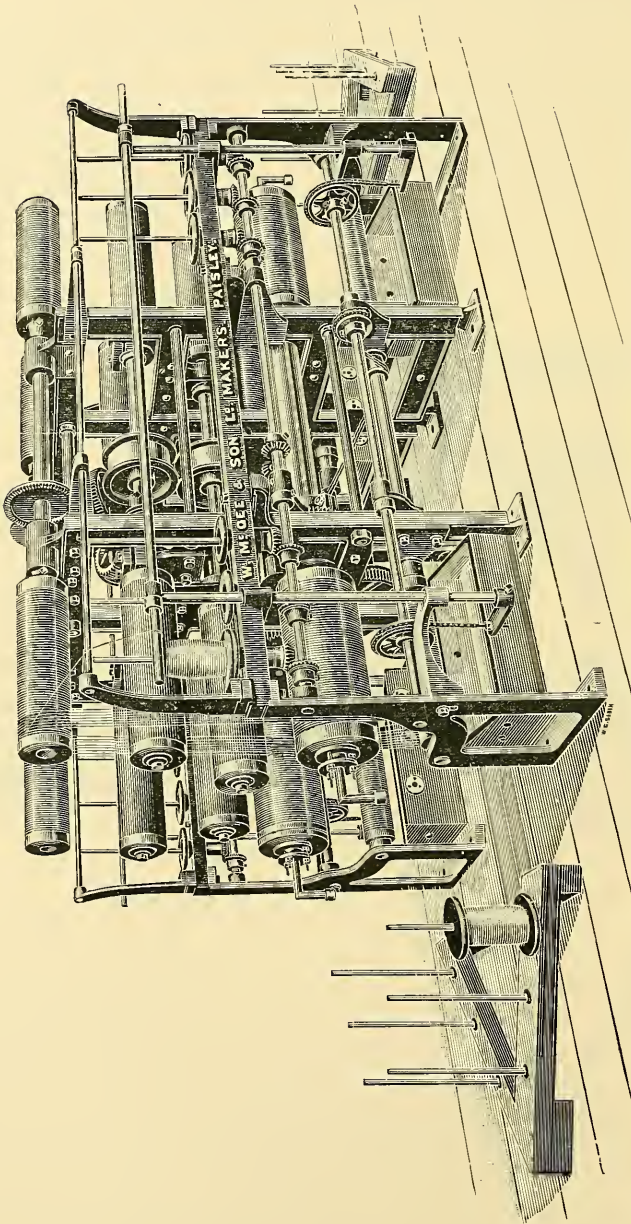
Bobbin-to-bobbin cord polishing machine. (Made by Messrs Walter M'Gee & Sons, Ltd., Paisley.)
